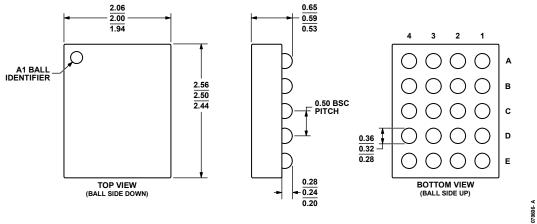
20-Ball Wafer Level Chip Scale Package [WLCSP] (CB-20-2) Dimensions shown in millimeters
